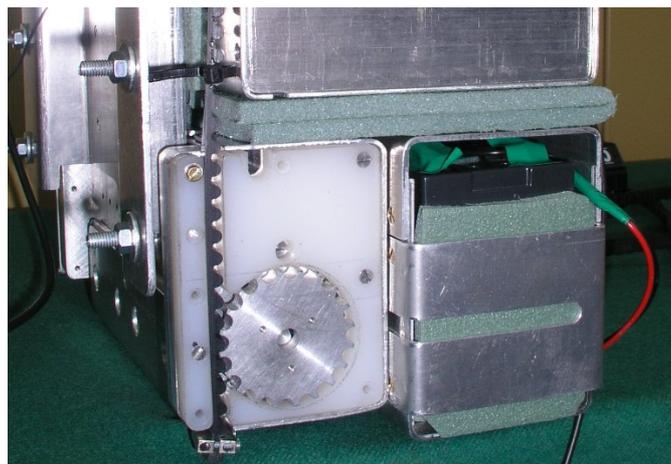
Actuator's gear - rack wheel and rack belt are visible after removing gear's lid.
